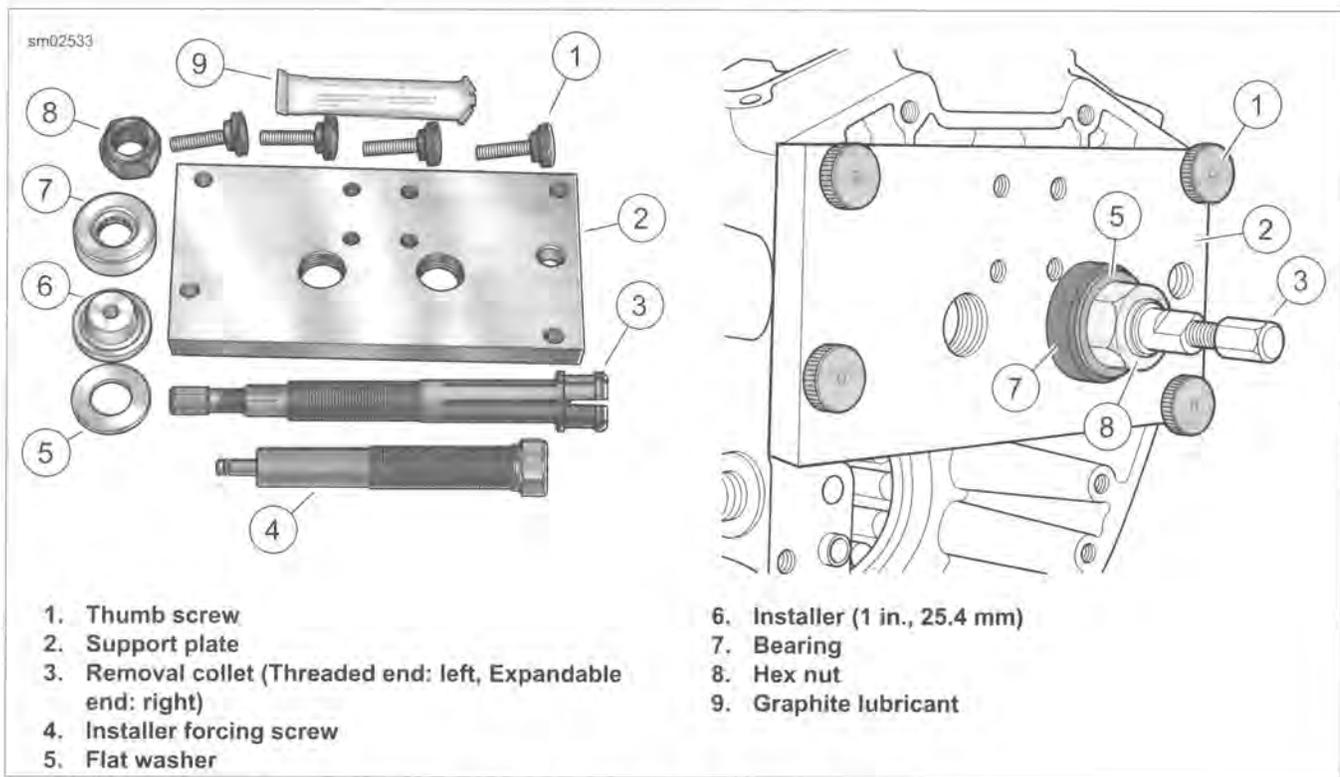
Camshaft Needle Bearing Remover/Installer
